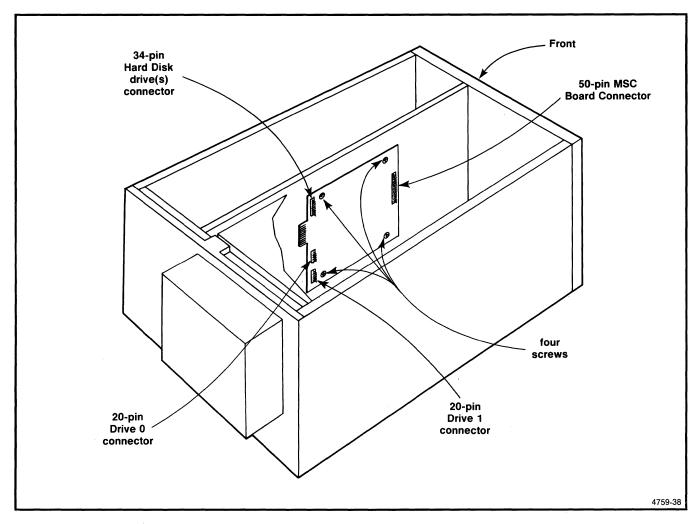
Xebec Disk Controller Board cable and screw locations.
